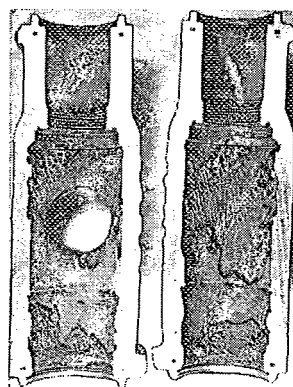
(right) — Corrosion-Erosion of Choke Body
